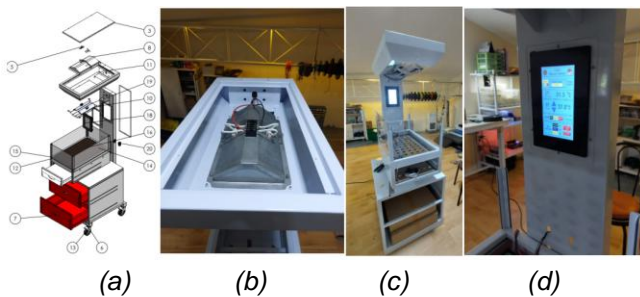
Hardware Prototype (a) Exploded View Of The Infant Warmer Assembly, (b) Heating Unit With Reflector And Mounted Heating Element, (c) Complete Prototype Of The Infant Warmer Structure, (d) Nextion HMI Panel For Temperature Control And Monitoring
